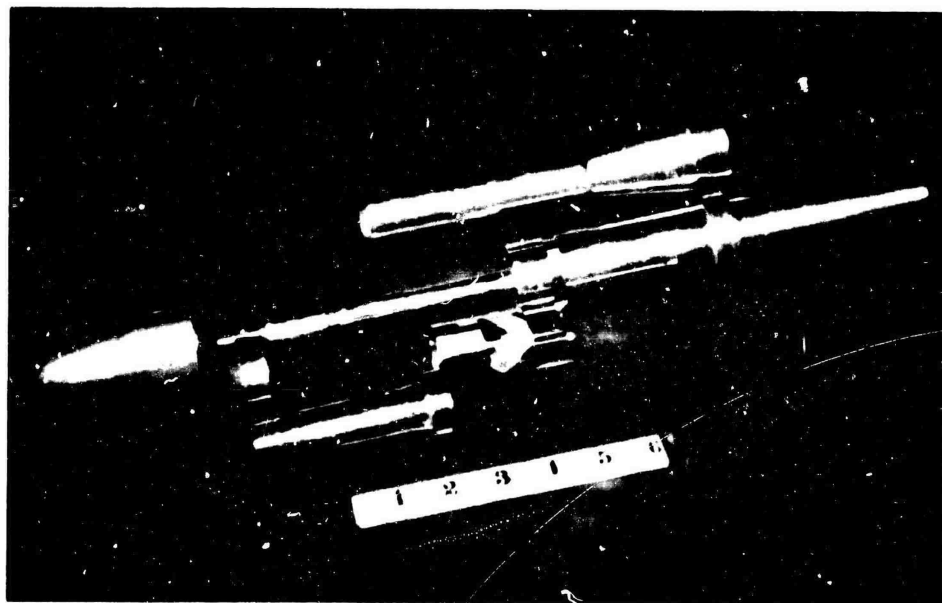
VIEW OF DYNAMOMETER BEFORE ASSEMBLY.
